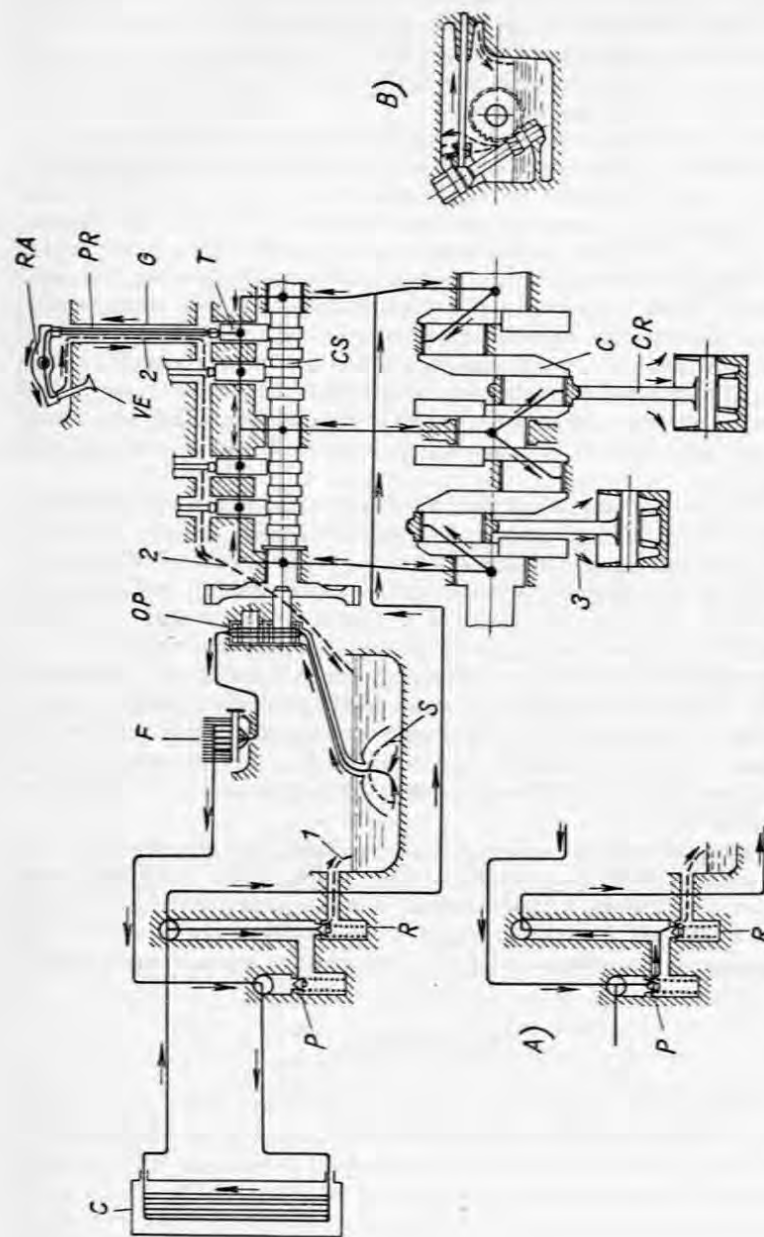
Lubrication of a Tatraplan engine with an oil sump in the crankcase. OP — oil pump, F — oil filter, P — relief valve, C — oil cooler, R — reducing valve.
